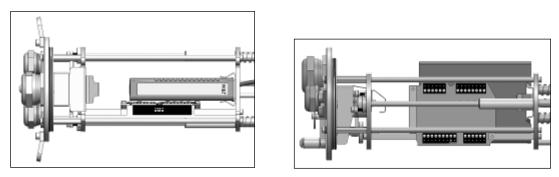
(a + b): Fitting the USB server Gigabit into the chassis (top view and right hand view)
